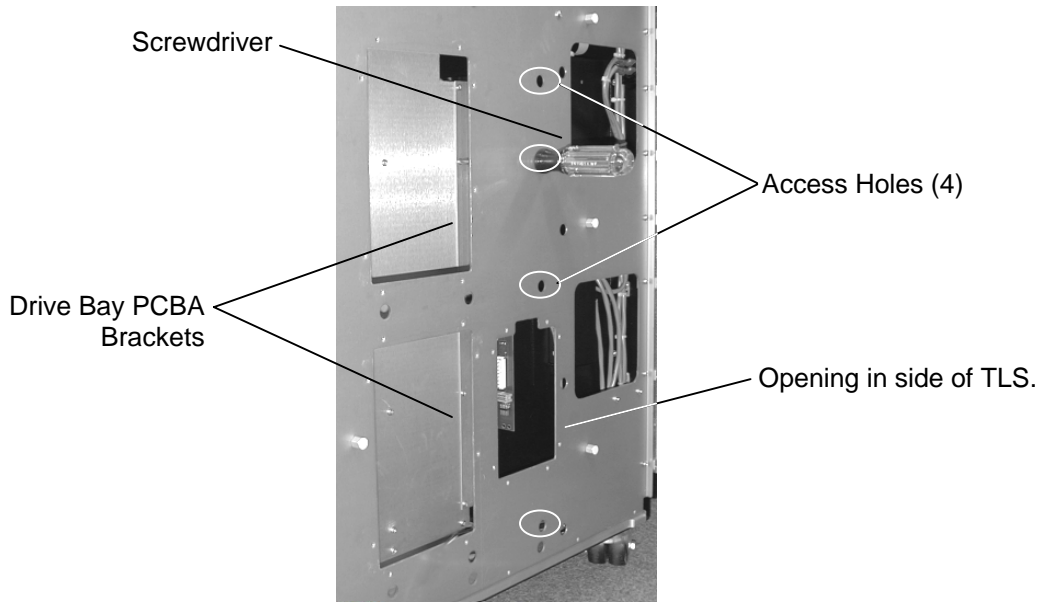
58xxx,68xxx and 88xxx Models Right Side Drive Bay PCBA Brackets and Access Holes
